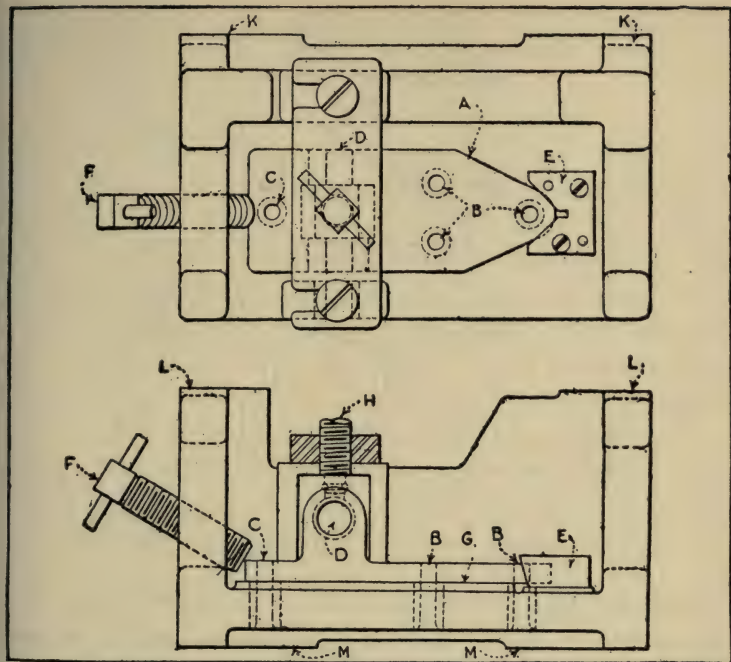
PLAN AND SECTION OF OPEN JIG FOR A SMALL BRACKET
